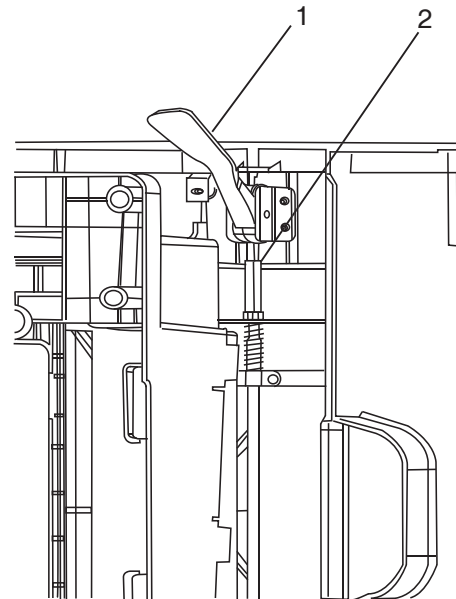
ADJUSTING THE CUTTING LINE INDICATOR (FIG. U)
